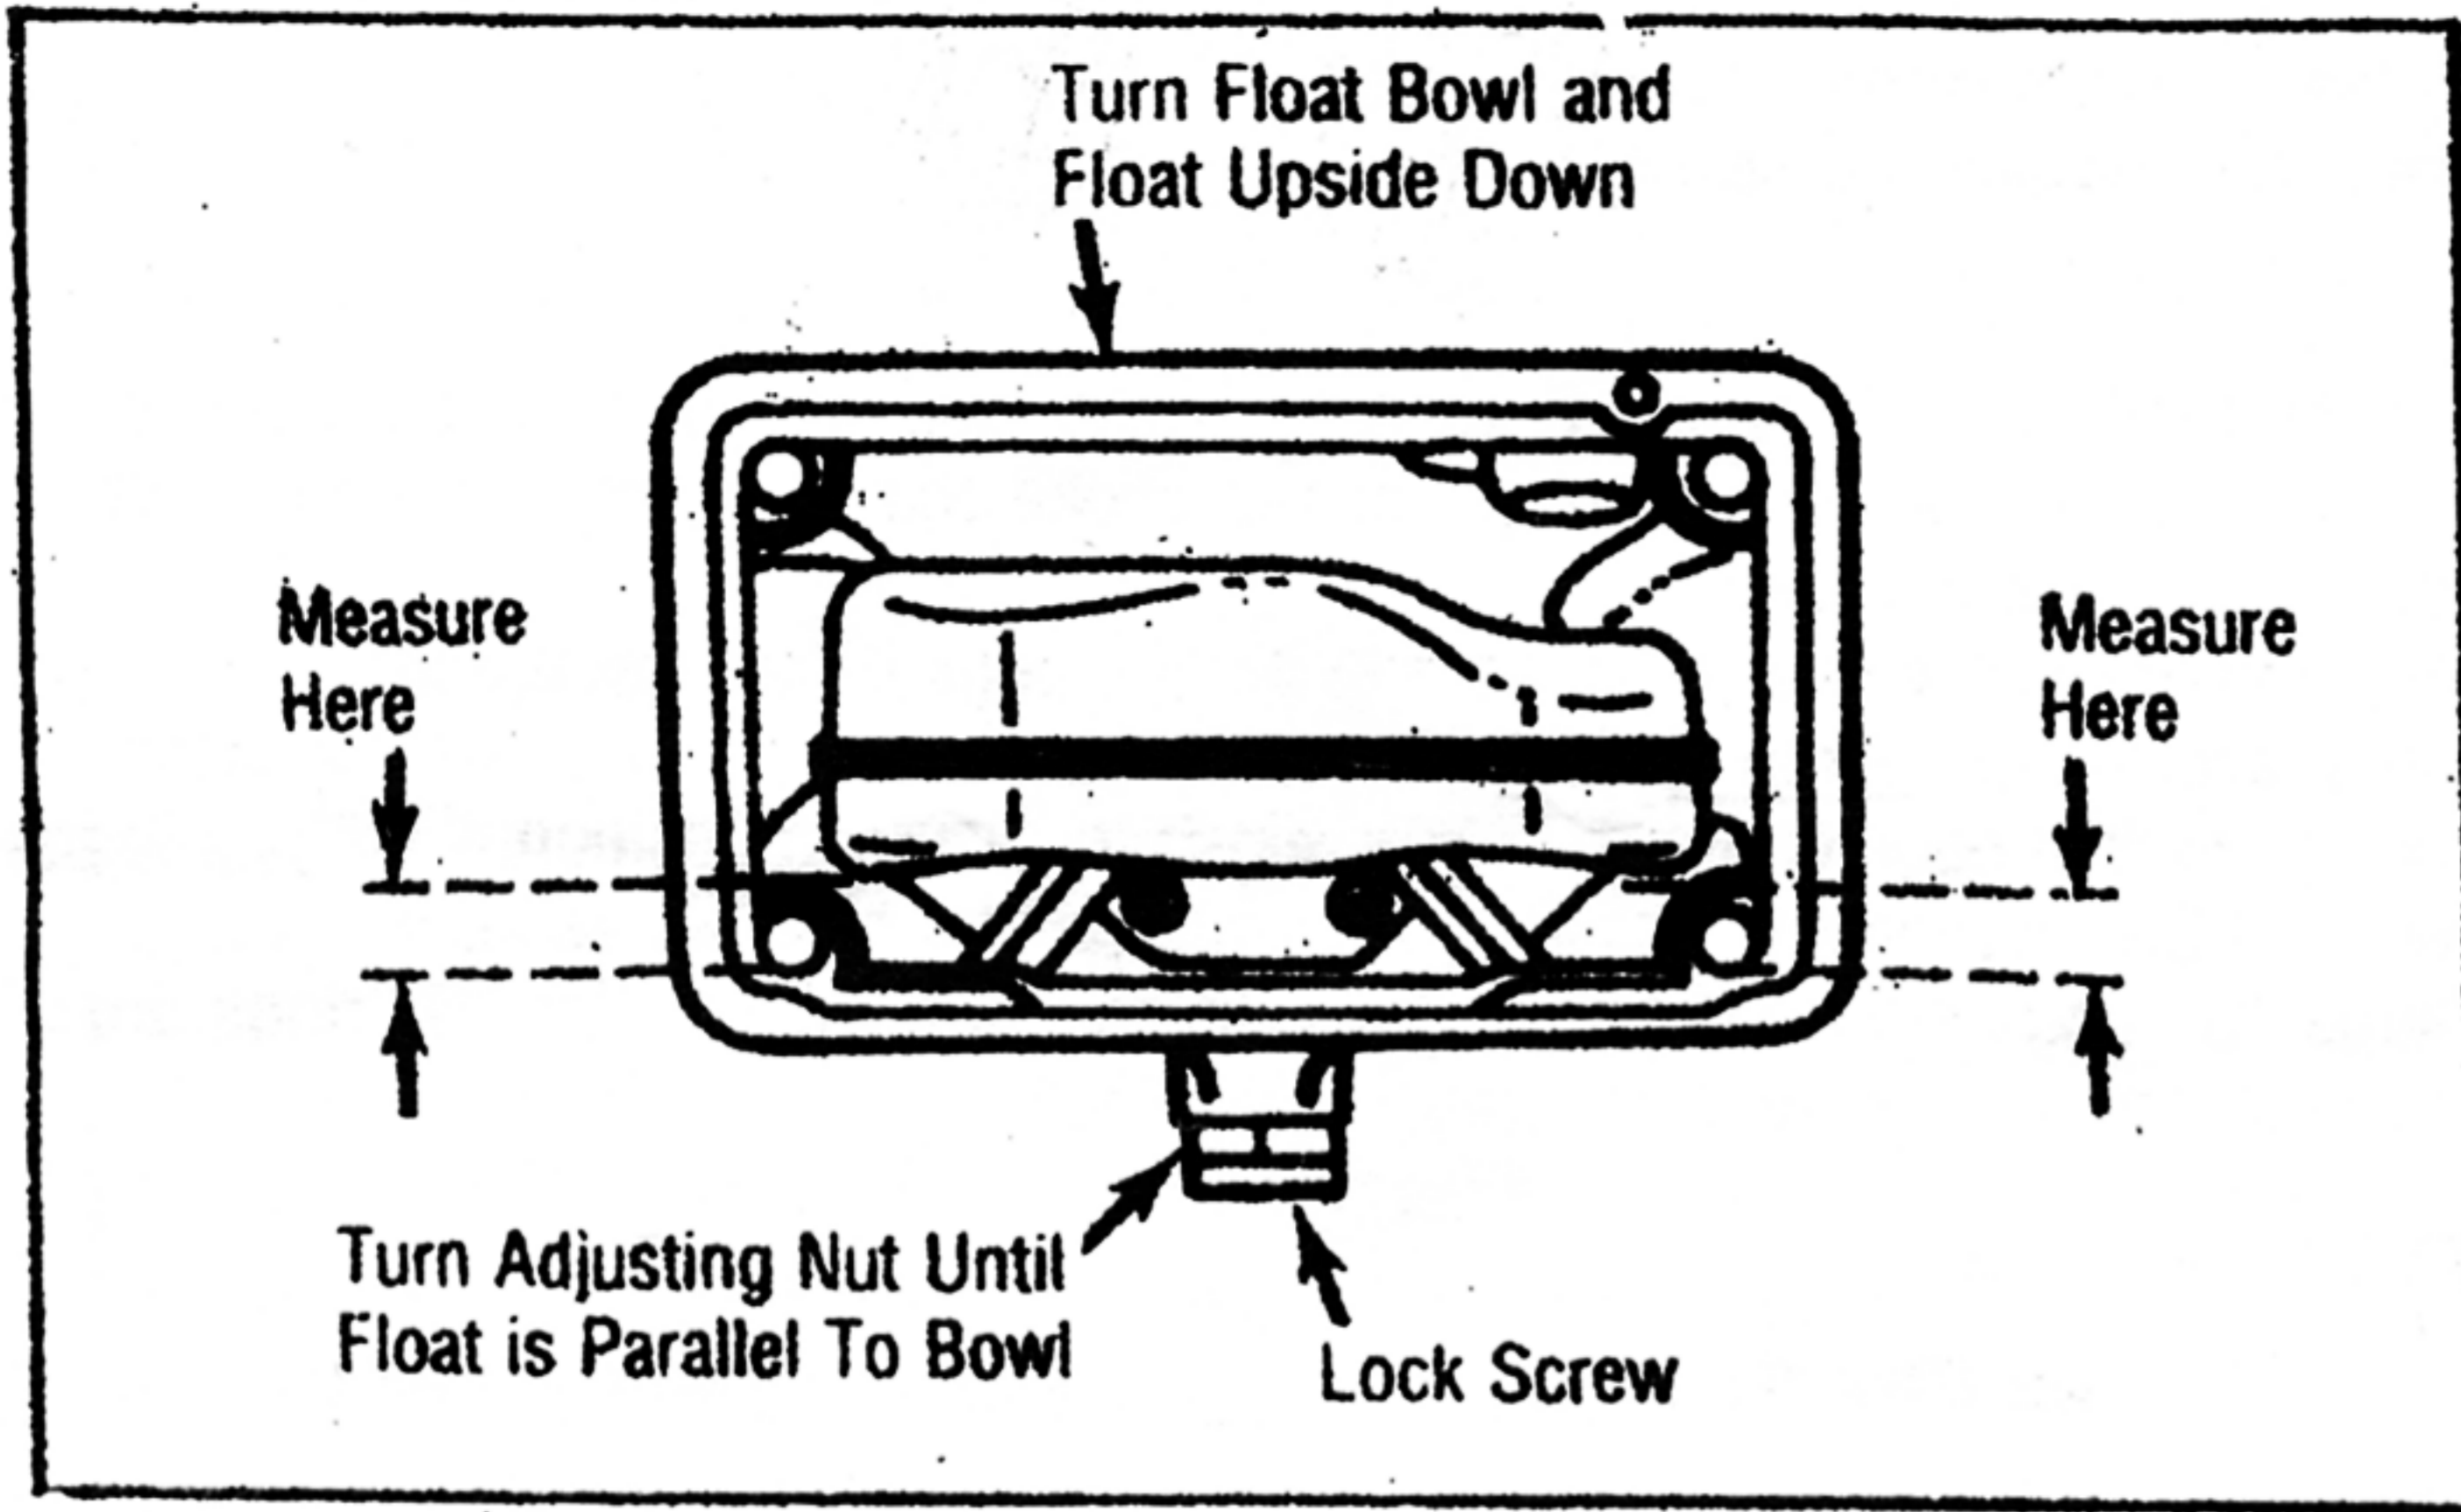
Float Level Adjustment - Dry Setting (Type C - If Equipped)
